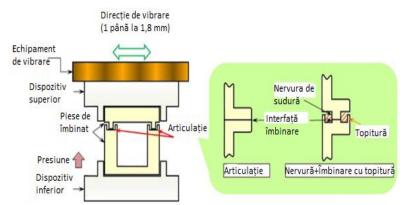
The scheme of the vibration welding process involving sinusoidal oscillations in the longitudinal direction,[10]
